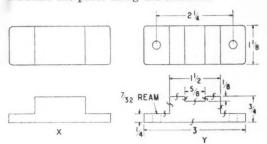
Detail X shows an aluminum rough casting, and detail Y shows the dimensions to which the casting was machined.
